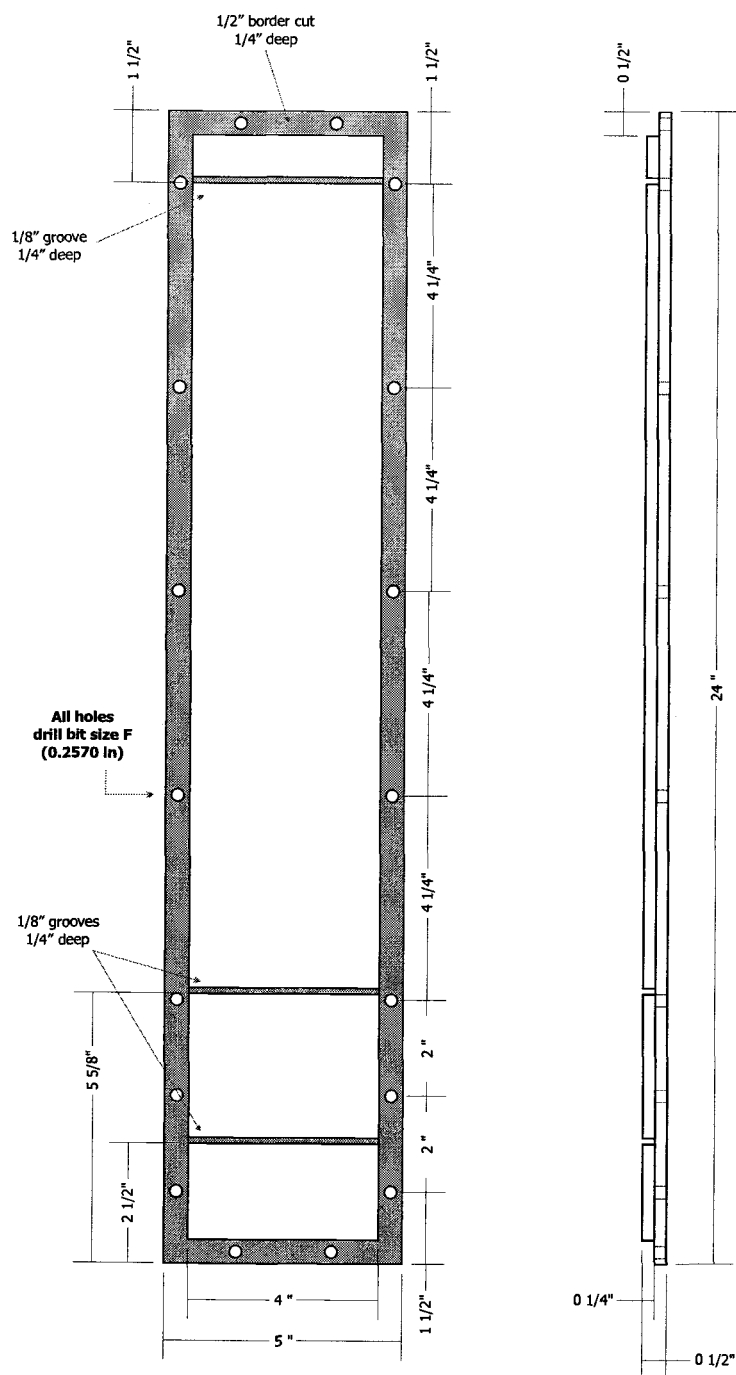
Front/back piece of fluidized bed. Scale 1:4, measures in inches. Two of this piece are required.
